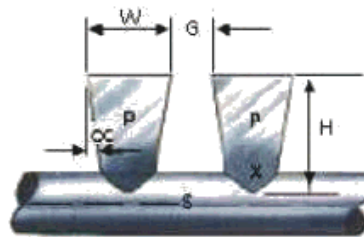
Illustrates the profile wire being electronically welded to the support rods by fusion process.
